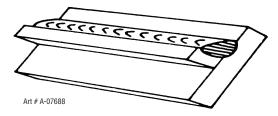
Flat Position, Gravity Fillet Weld
